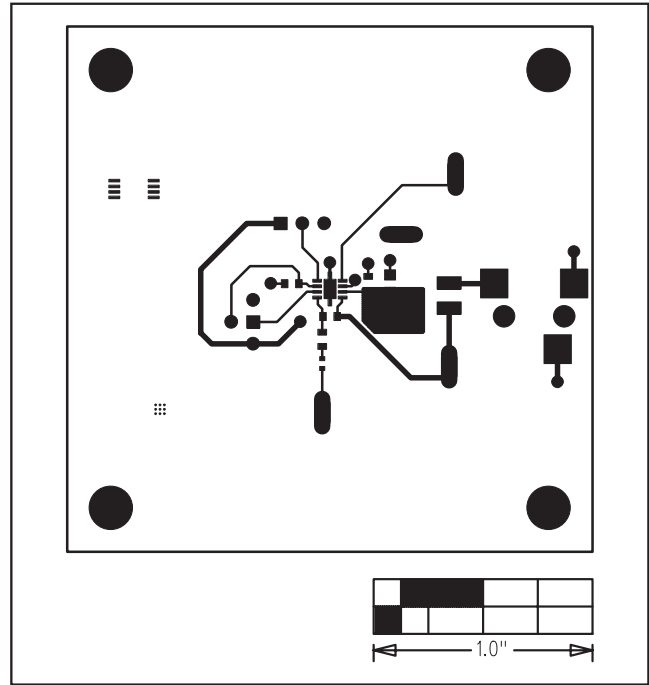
MAX9716 EV Kit PC Board Layout—Component Side
